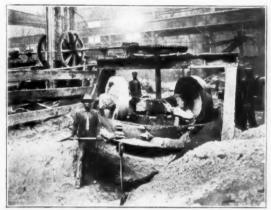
Typical illustration of a grinding mill. Note the extent to which the driving gears and bearings are exposed.
